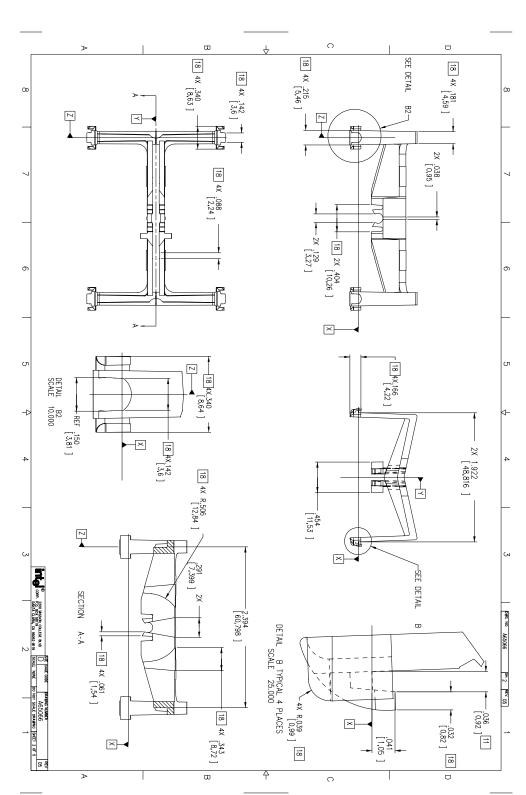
MCH Heatsink Clip Frame (Sheet 3 of 3)
